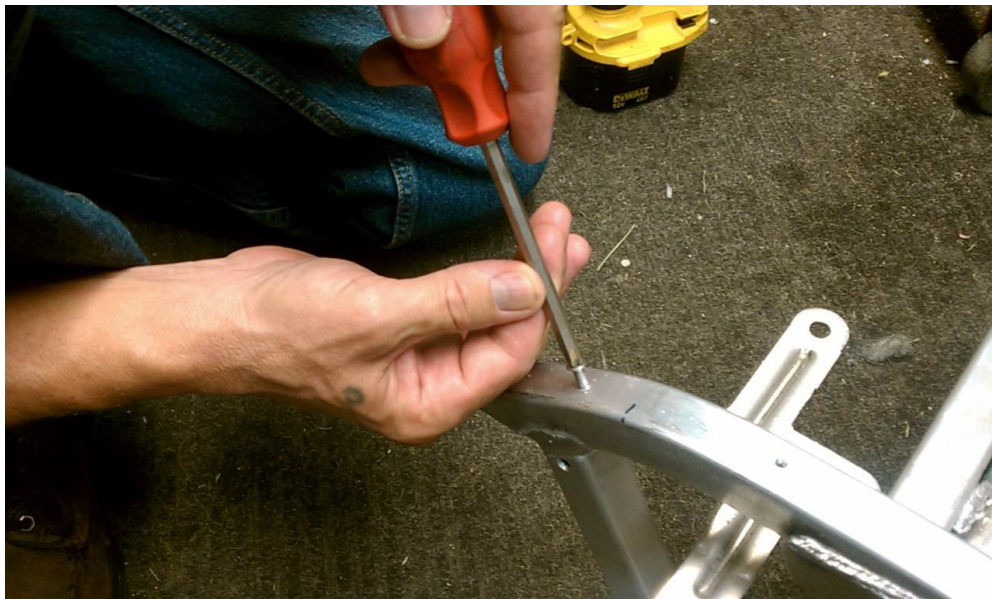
Important- Clean the threads of the self tapping screw to get all the metal out of the threads before tapping each hole, then apply a drop of oil to the threads. Keeping it parallel to the skid plate carefully thread it in to the newly drilled hole. Do not tighten it, only go about half way in.
